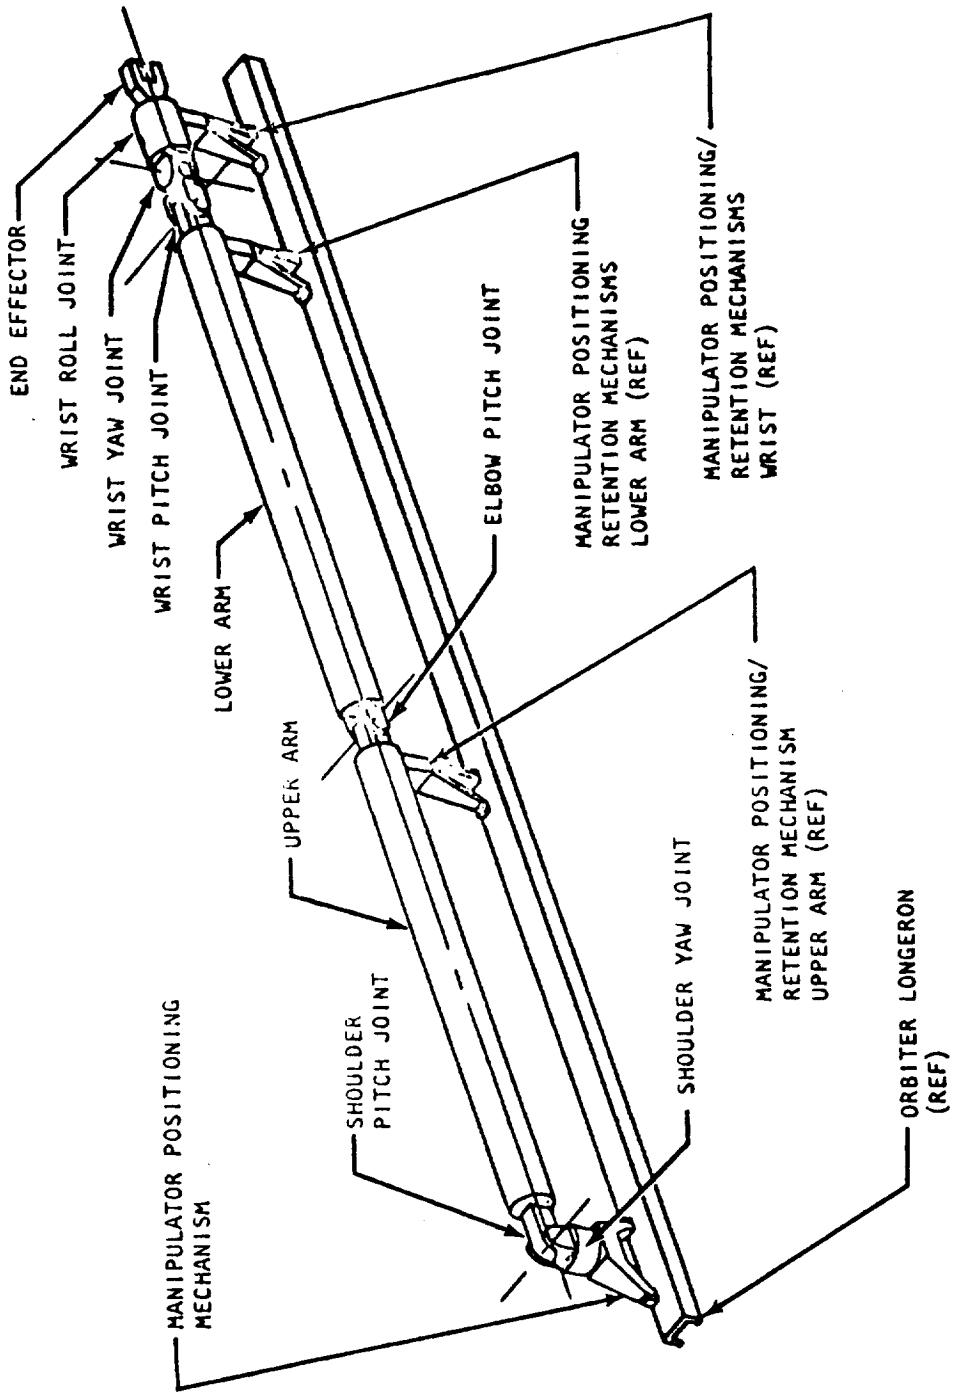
MANIPULATOR ARM ASSEMBLY NOMENCLATURE
